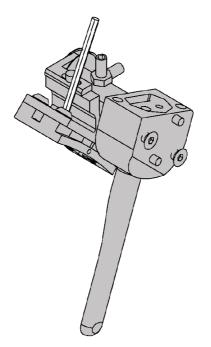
Bracket equipped with a retractable survey mark. The key in white will be removed
